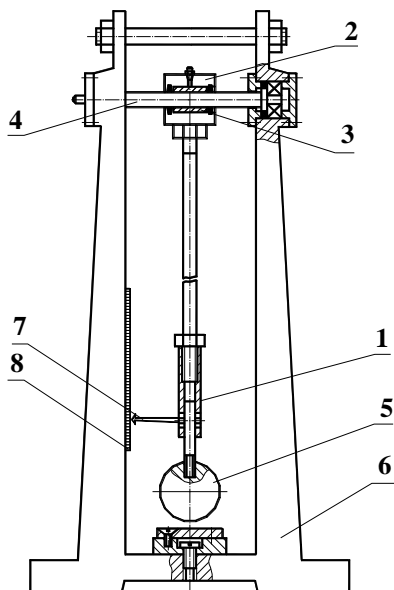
Design of the pendulum device: 1 – suspension; 2 – sliding support; 3 – insert; 4 – shaft; 5 – load; 6 – housing; 7 – indicator; 8 – dial
